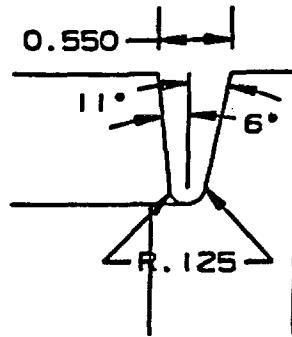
Inner Lid Narrow Groove Weld Joint Geometry
